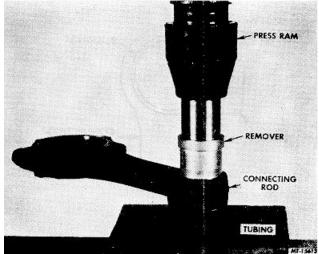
Removing Piston Pin Bushing from Connecting Rod
